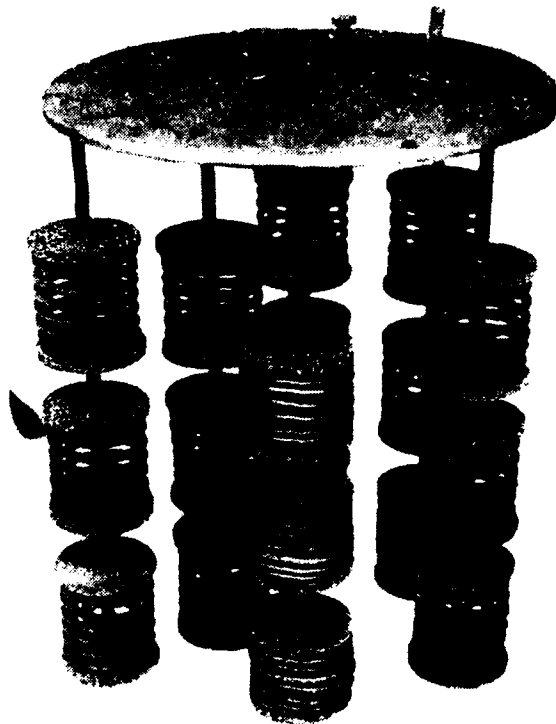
0.6X Photograph of the compression springs with low alloy steel end flanges after 30 days in the autoclave environment. Crystals of corrosion product are visible on end flanges and springs.
